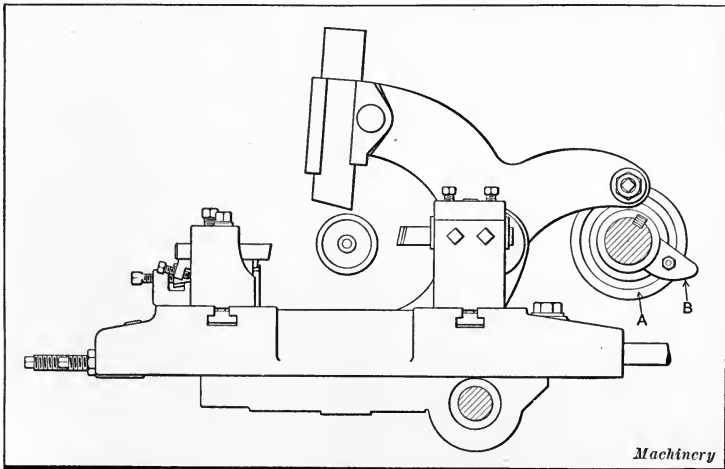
Arrangement of Cross-slide Tools for the Forming and Cutting-off Operations on the Part shown at C in Fig. 18
